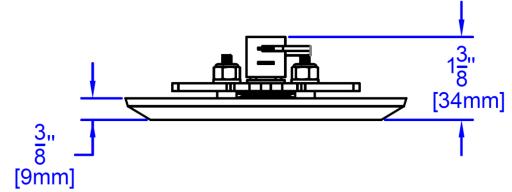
8228-01 4 1/2" and 8228-00 6" RND Side View
